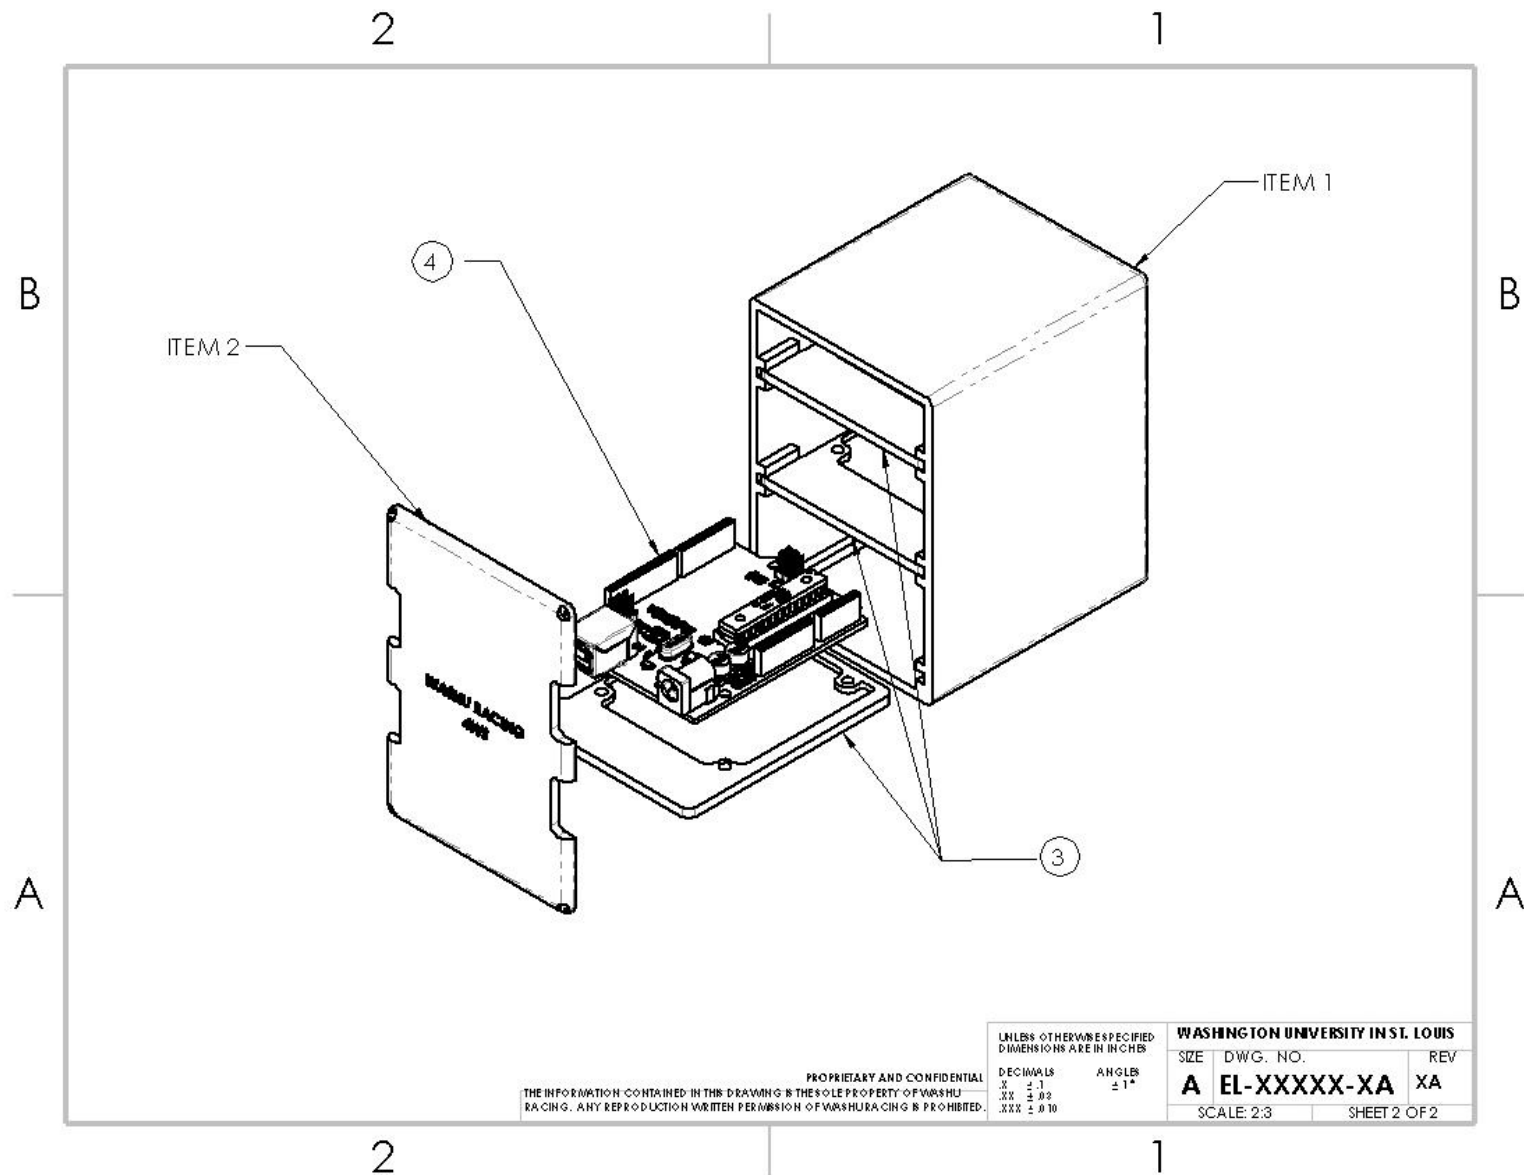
Draft assembly drawing for the Arduino case (sheet 2).
